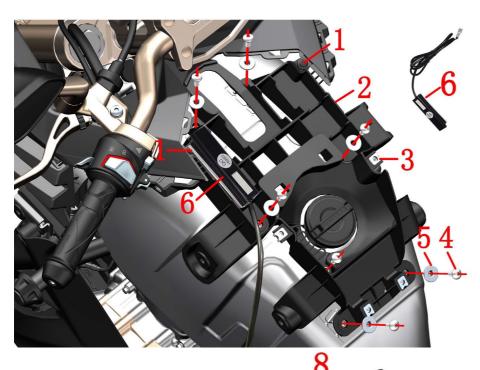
TANK LINER		Tank box assembly (Small fuel tank)	CHK	(0)
